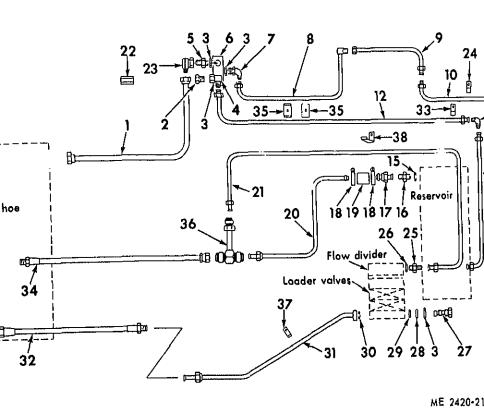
Backhoe Hydraulic Tubes And Connections
